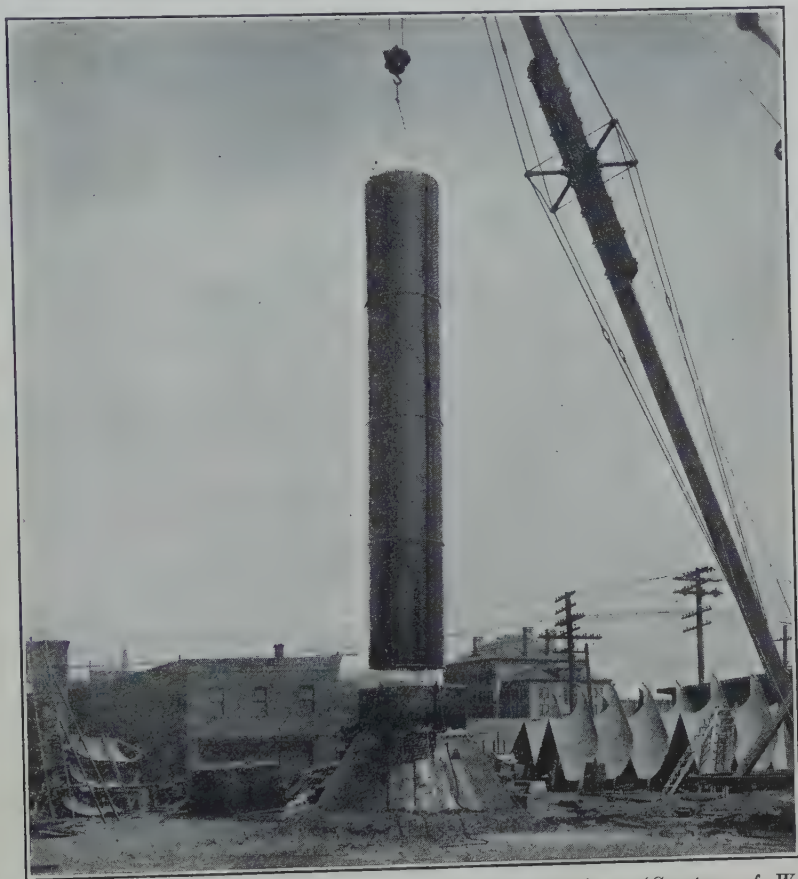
Electrically operated dipping kettle for steel pipe. (Courtesy of Walsh's Holyoke Steam Boiler Works.)
